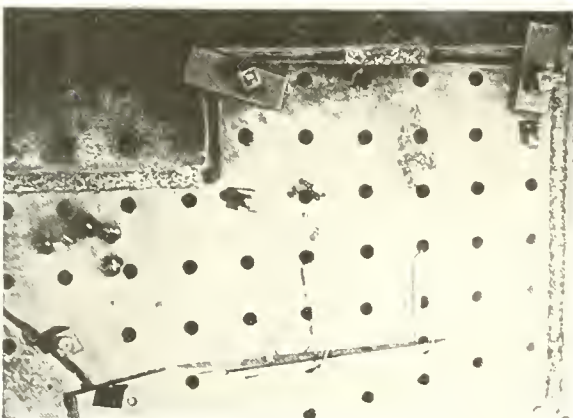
Providing for expansion in side sheets by making the weld in the alternate sections.
